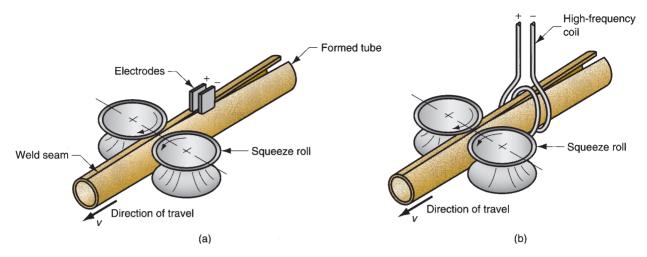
Welding of tube seams by: (a) high-frequency resistance welding, and (b) high-frequency induction welding.
